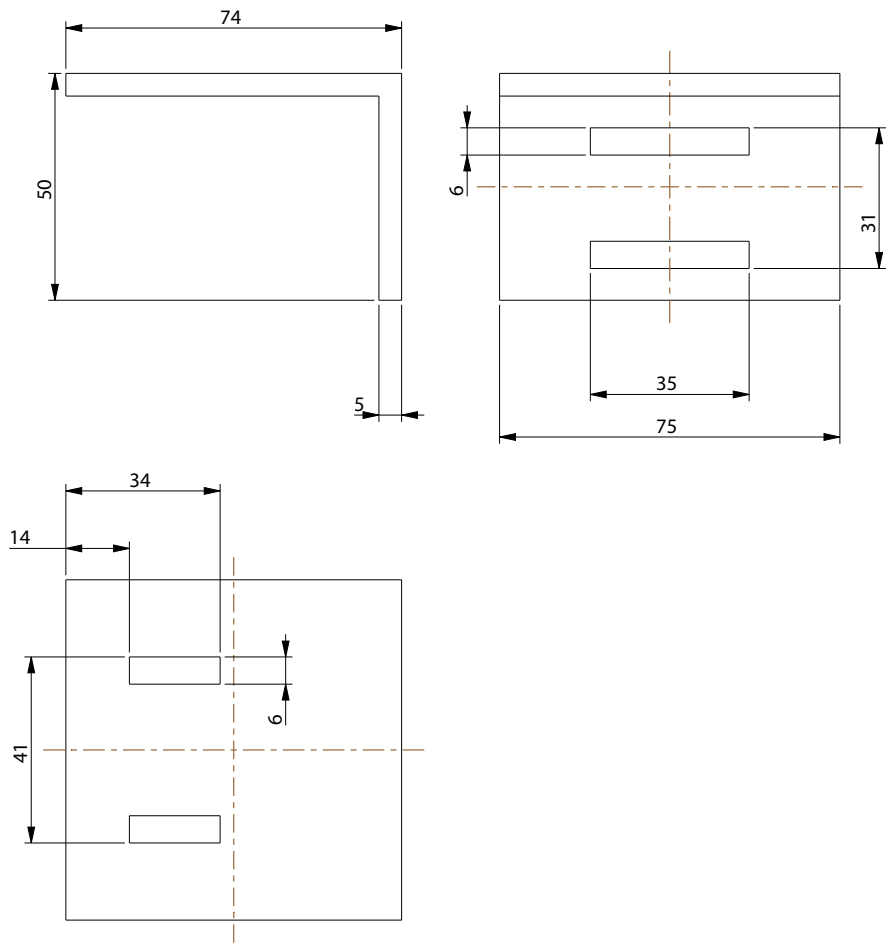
Design drawing of the front mount of the He-Ne laser tube.
